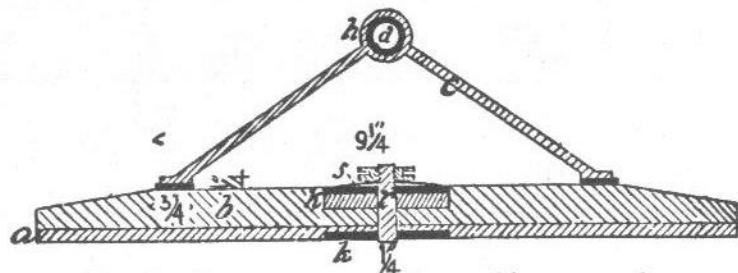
SECTION THROUGH DISC & HORIZONTAL BRACES
